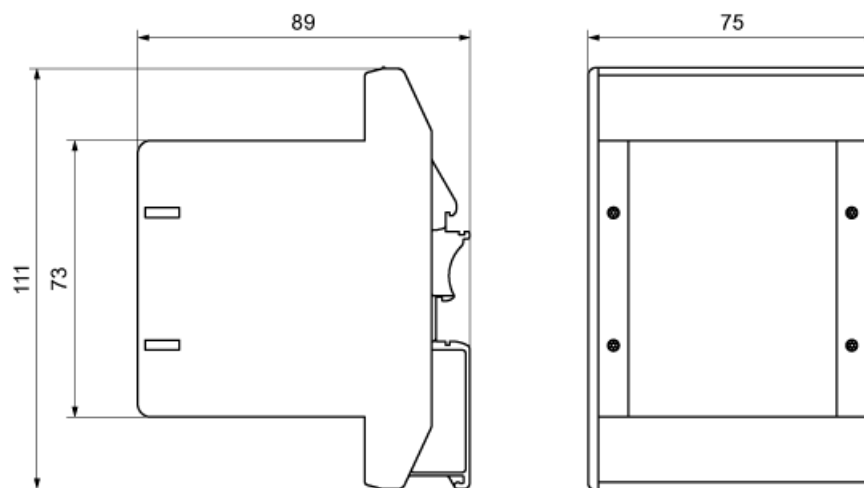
Dimension drawing of the Safe Brake Adapter (data in mm)
